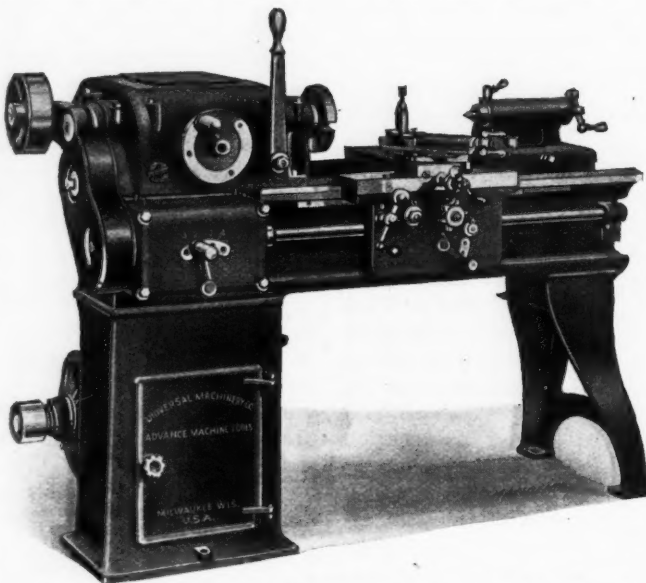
High-speed All-g geared Manufacturing Lathe built by Universal Machinery Co.
